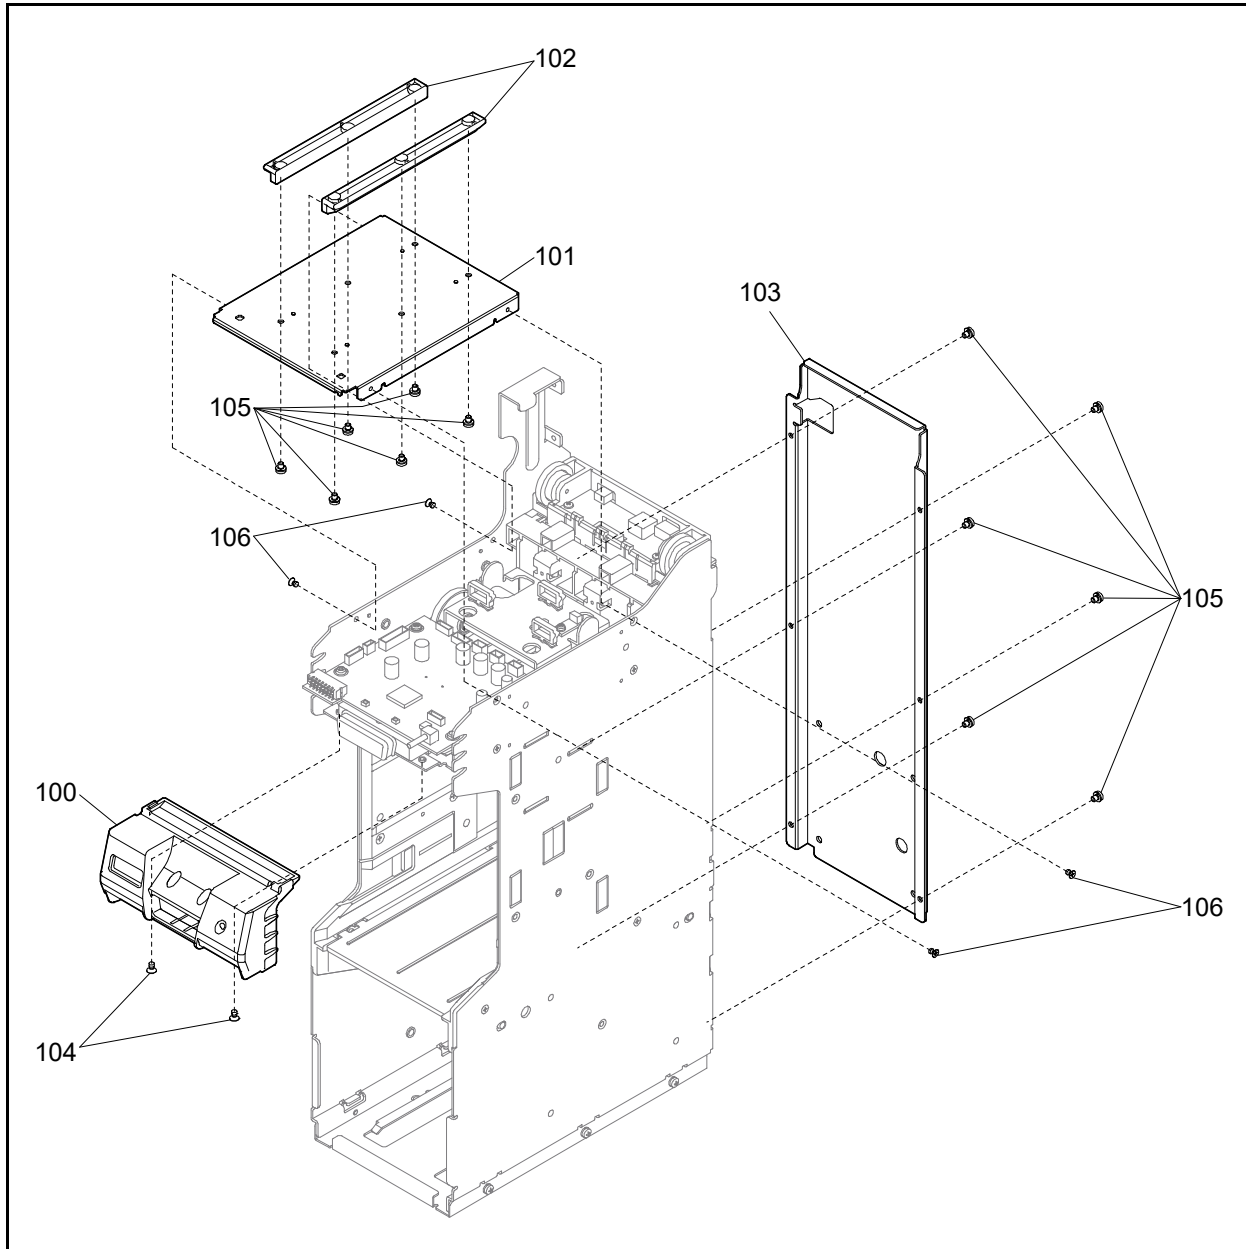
iPRO-RC Frame Unit 1 Exploded View
